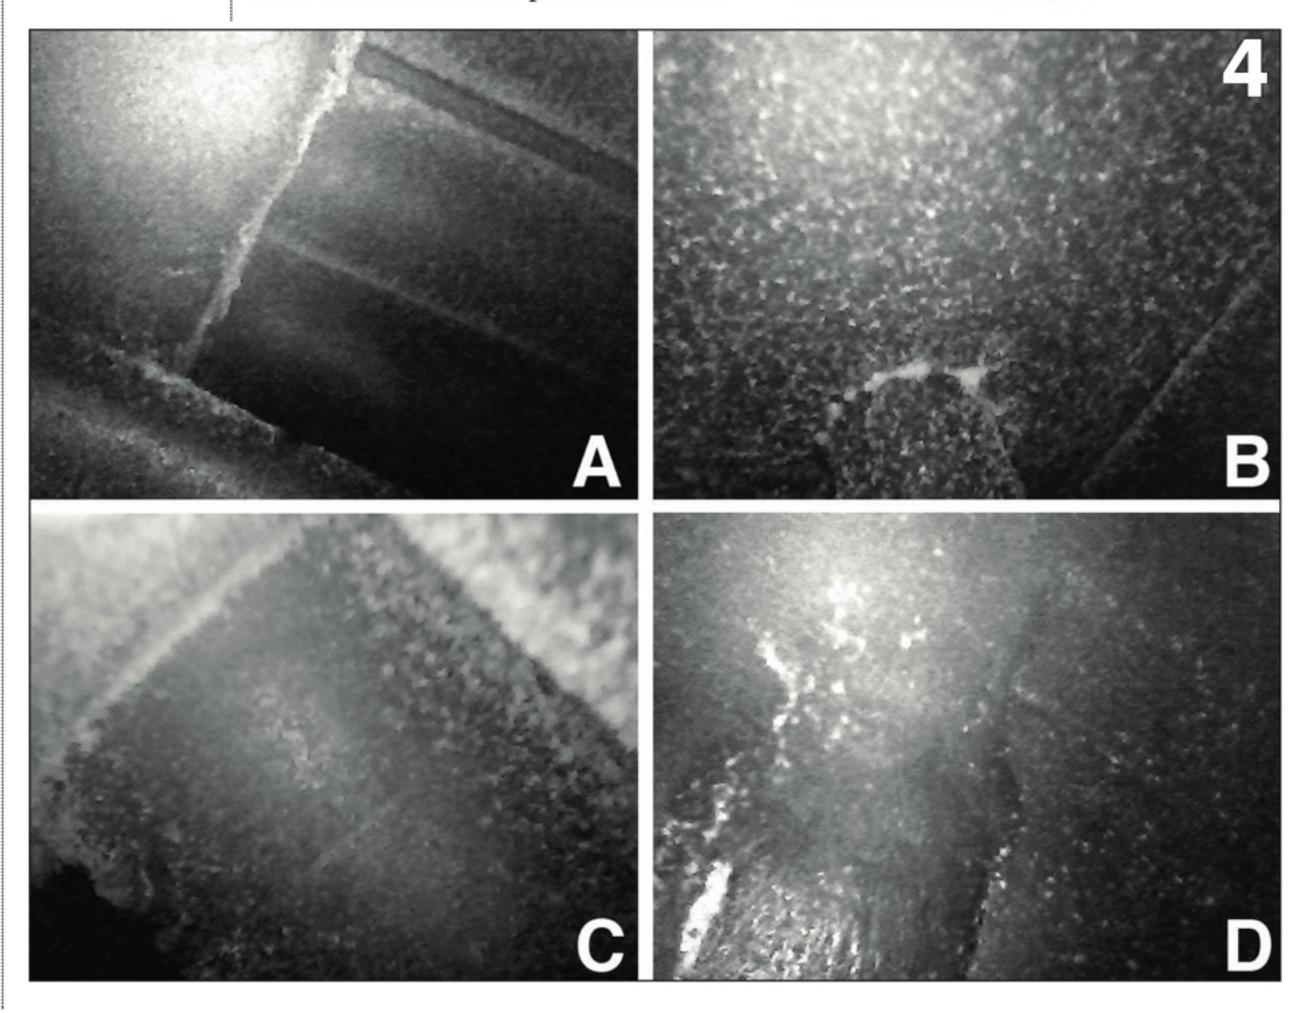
D shows what I saw when feeding the borescope further down into the boiler, when the cable was passing around the entire bunch of flues – it is the longitudinal barrel seam on the bottom of the boiler. The welded seam is about ½-inch wide and ½16-inch high. No crud or scale here, either! Blowing down your boiler regularly is obviously a good idea!
